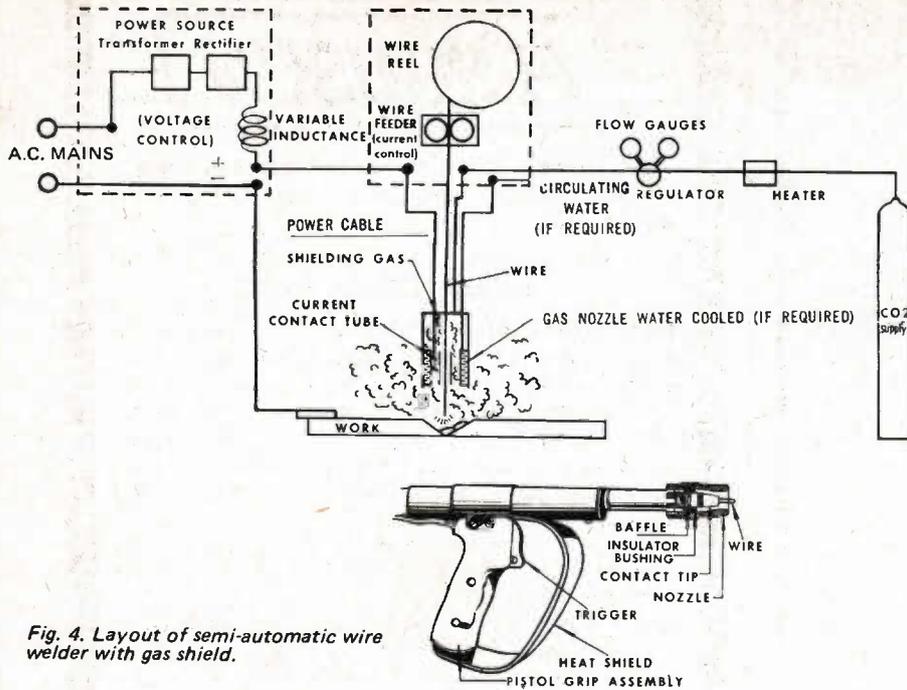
Layout of semi-automatic wire welder with gas shield.
